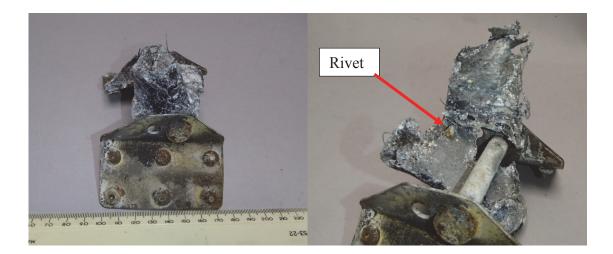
Remains of A-strut upper attachment and (lower view) rivet
